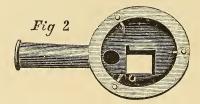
represents the lower half of tuyer, showing opening for air valve and rests for gauge plate.
